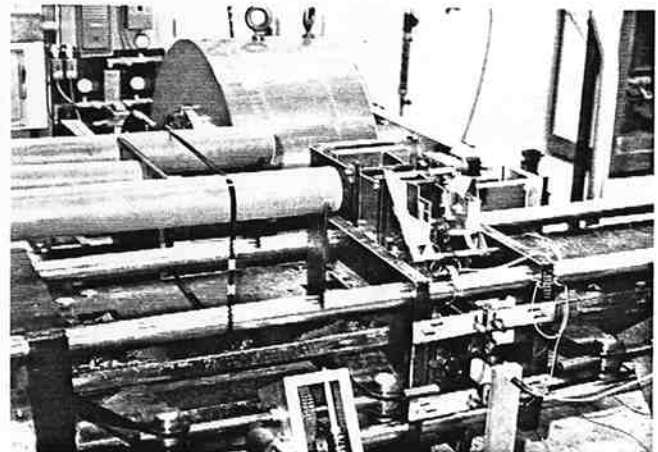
Rail welding fixture attached to 10-MJ HPG
